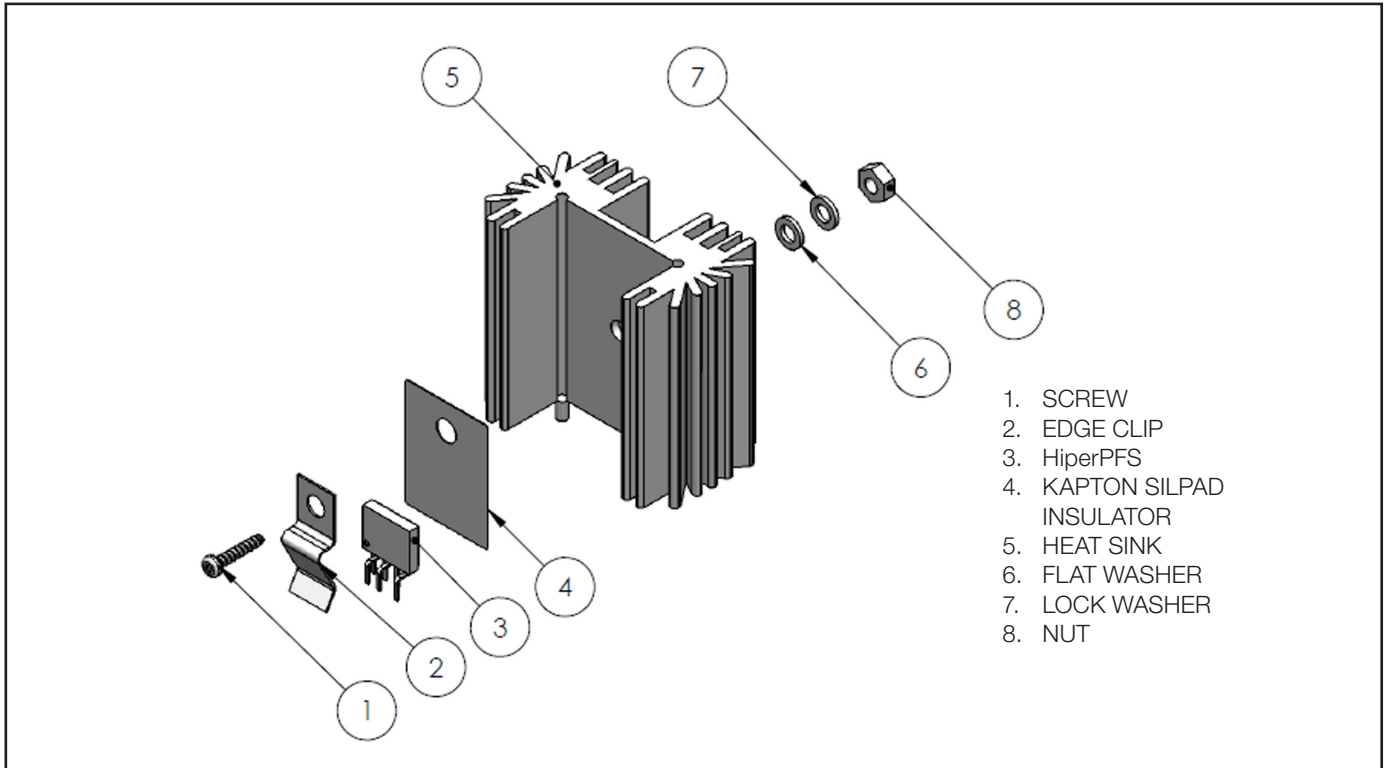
Heat Sink Assembly Example – Low Power Designs.
